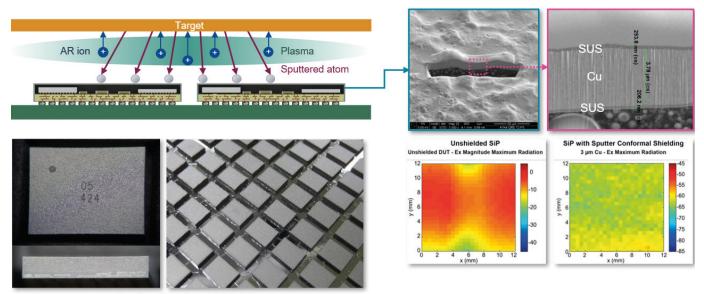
EMI shielding techniques for DSMBGA packages to achieve improved system performance.
